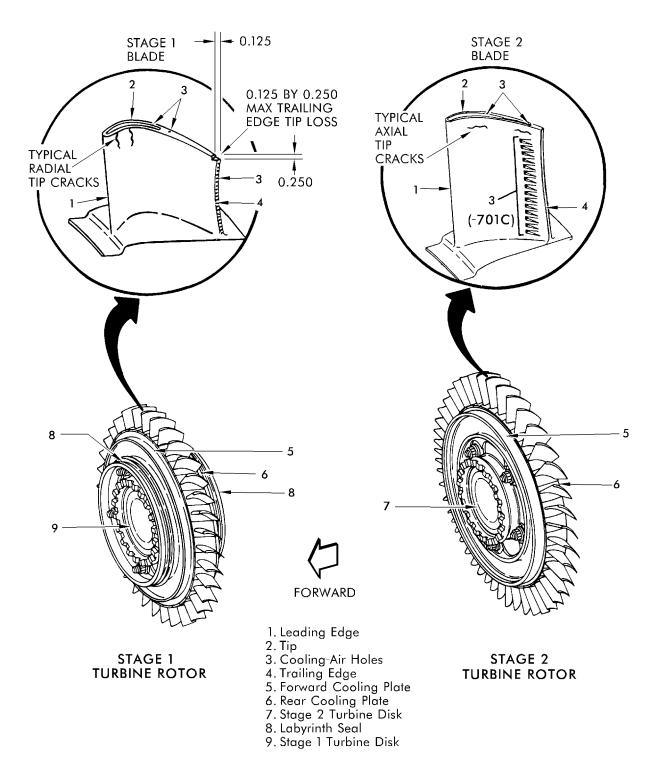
(T700, T701, T701C) Stages 1 and 2 Gas Generator Turbine Rotor; Inspection
